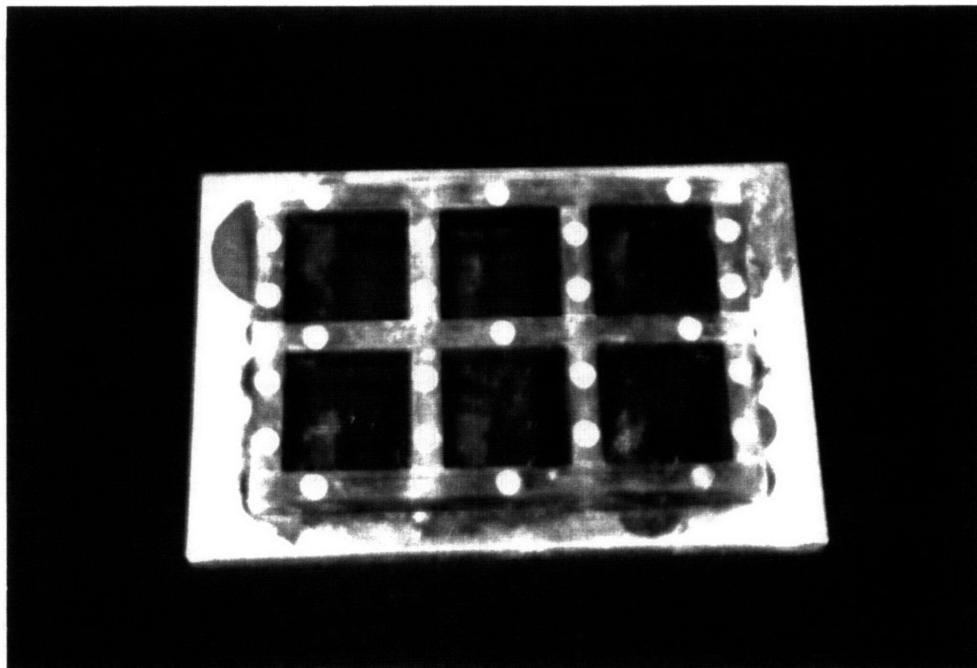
Brass mold used to cast specimens, divided into six sections
